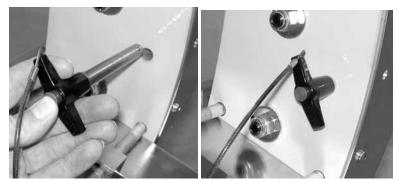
Insert both frame locking pins through the stationary ring and rotating ring. Press the button on the handle of the pin to insert or remove it.
